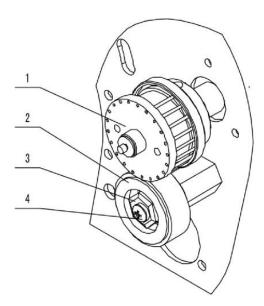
(1) Printing Wheel, (2) Silicone Wheel, (3) Eccentric Sleeve, (4) Screw
